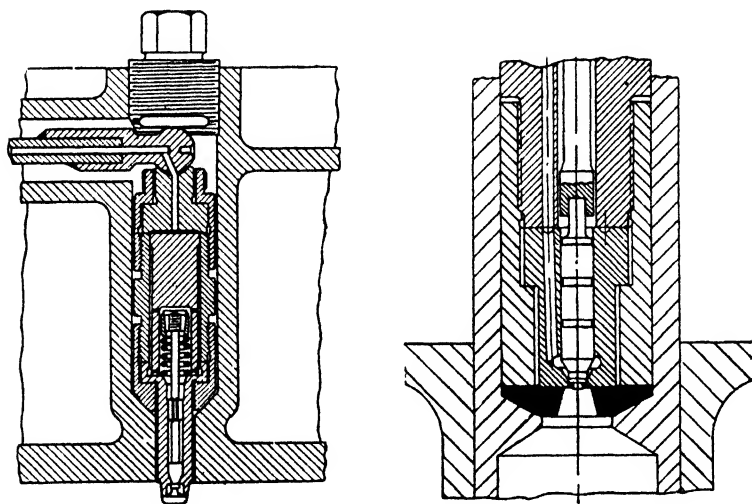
(Left).—SAURER INJECTION NOZZLE AND MOUNTING.
